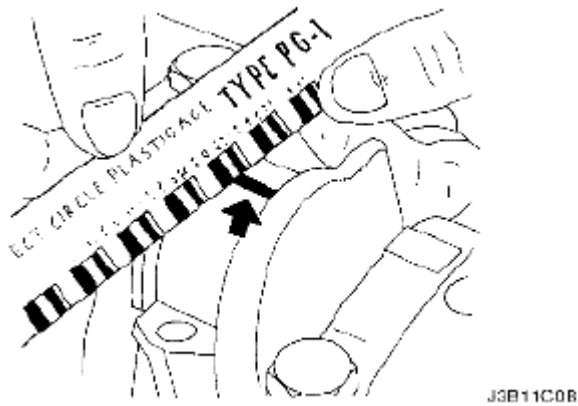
Locating Bearing Clearance For Permissible Tolerance Ranges
